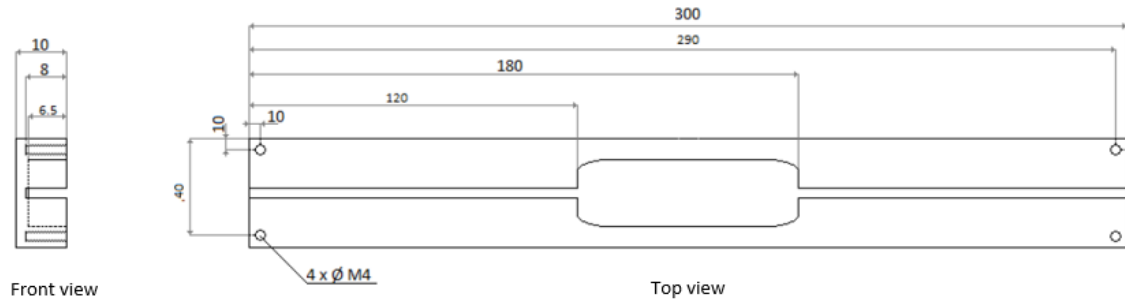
Dimensions U-shaped steel plate used for MV-pile A5
